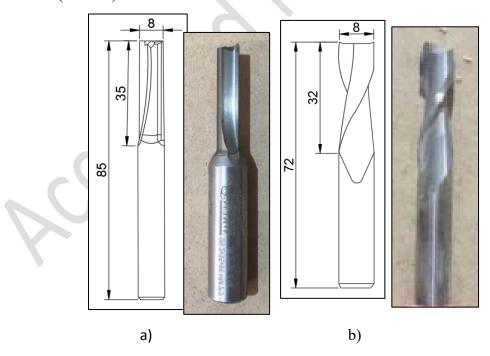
High speed stell end mills (mm) a) Two-flutes straight end mill (Netmak), b) Twoflutes helisel end mill (Knob).
